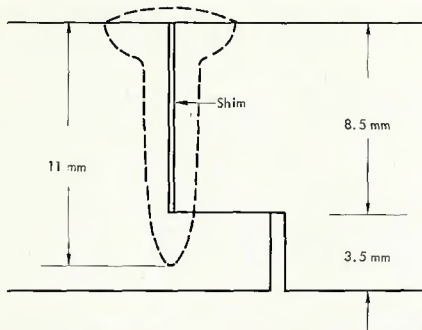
Typical weld geometry used in the first experiment, shown with exaggerated shim thickness and dashed lines to indicate the fusion zone in the completed weld
